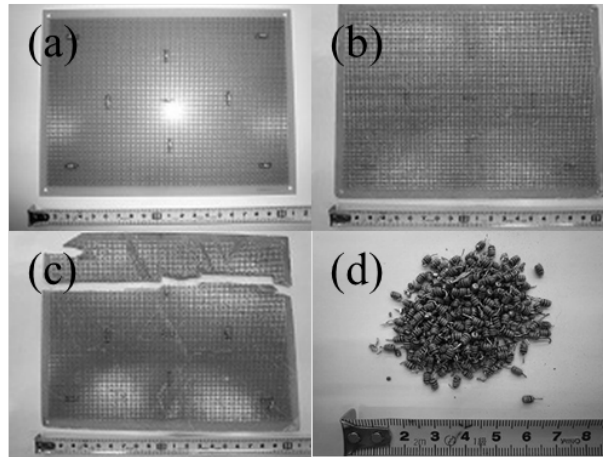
Result of comminution experiment for test PCB using drum-typed impact agitation mill: (a) test PCB before comminution test, (b) unbroken PCB, (c) broken PCB, (d) detached parts
